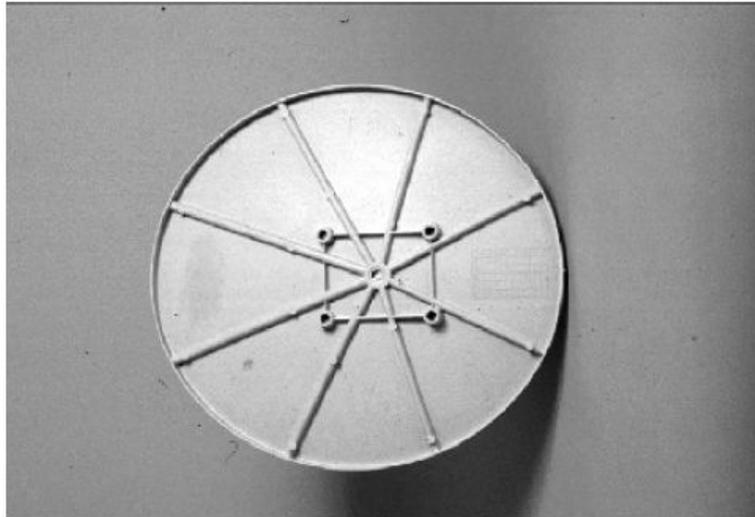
Gas-assisted injection molding rib pattern.
